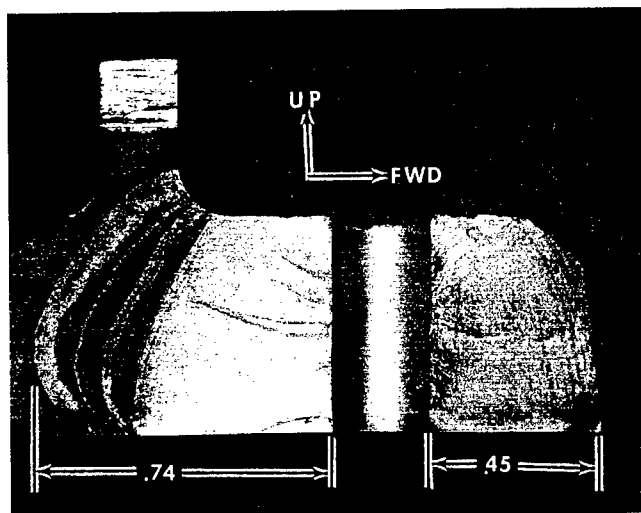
CZ-184, Stiffener S7, Hole 65, Base Flange Crack
